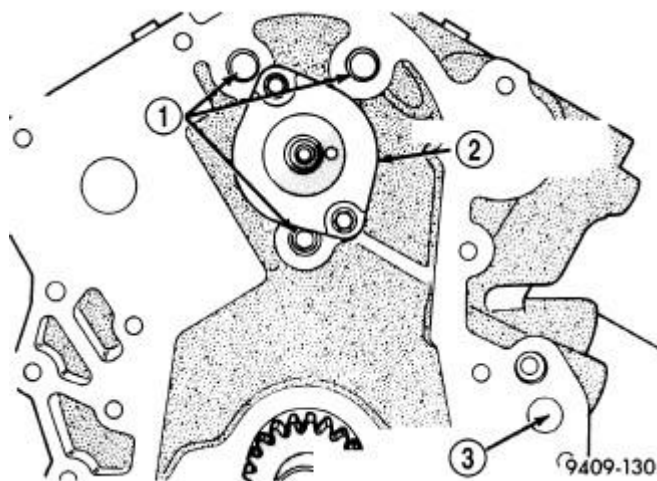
Oil Gallery Cup Plugs, Camshaft Thrust Plate & Oil Feed Gallery
